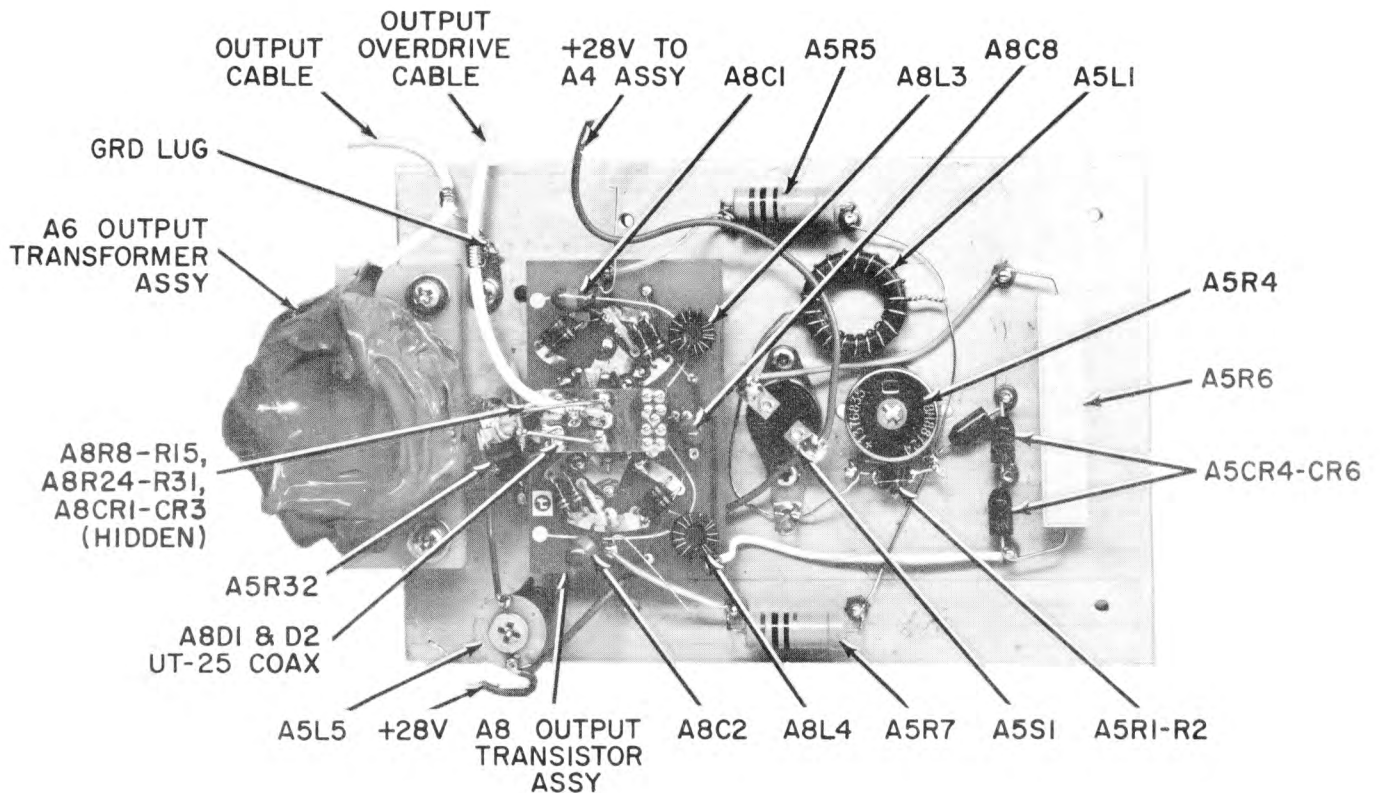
Heatsink Assembly A5 and Output Transistor Assembly A8, Component Locations
